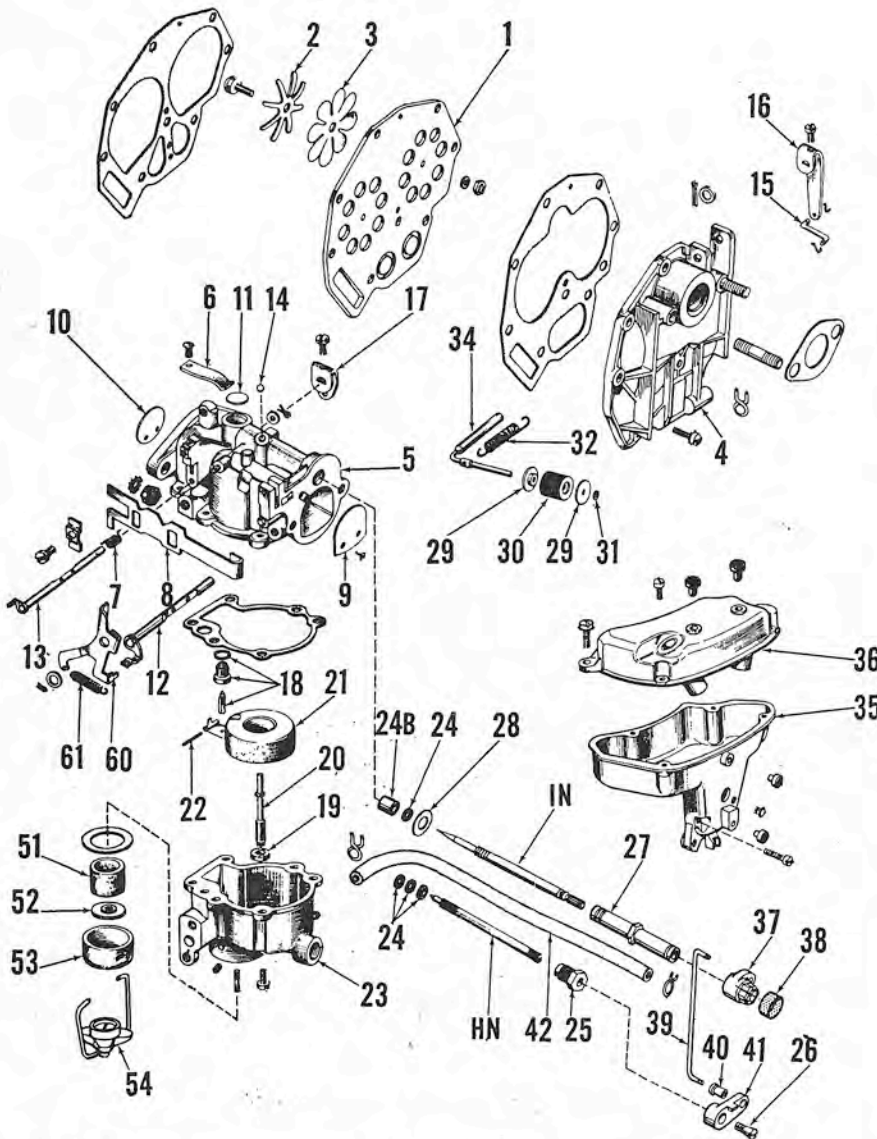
Exploded view of series QD carburetor, silencer and reed valve assembly. Series FD is similar. Refer to legend under Fig. J2 except for the following.
